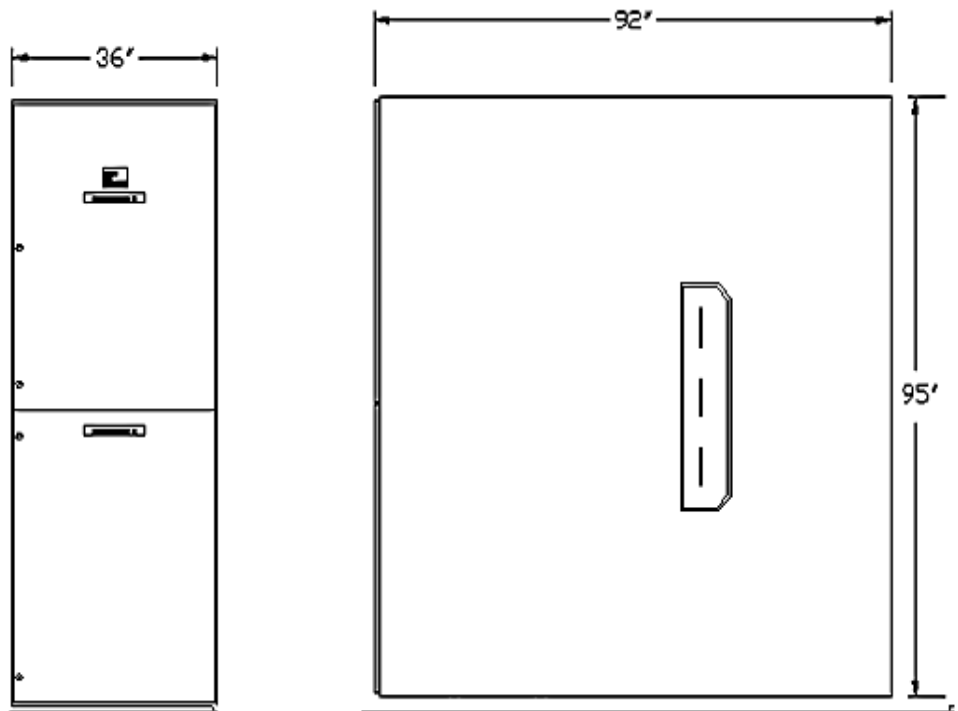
Traditional APT 15A-Series MetalClad Switchgear Single Section Dimensions (rear access required)
